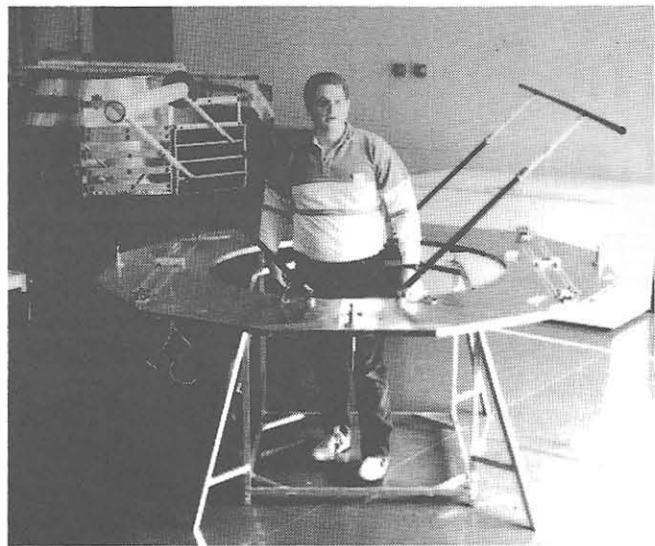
Phase IV Top Plate Assembly with antennas in deployed position, student Ken Hill inspecting the assembly.
